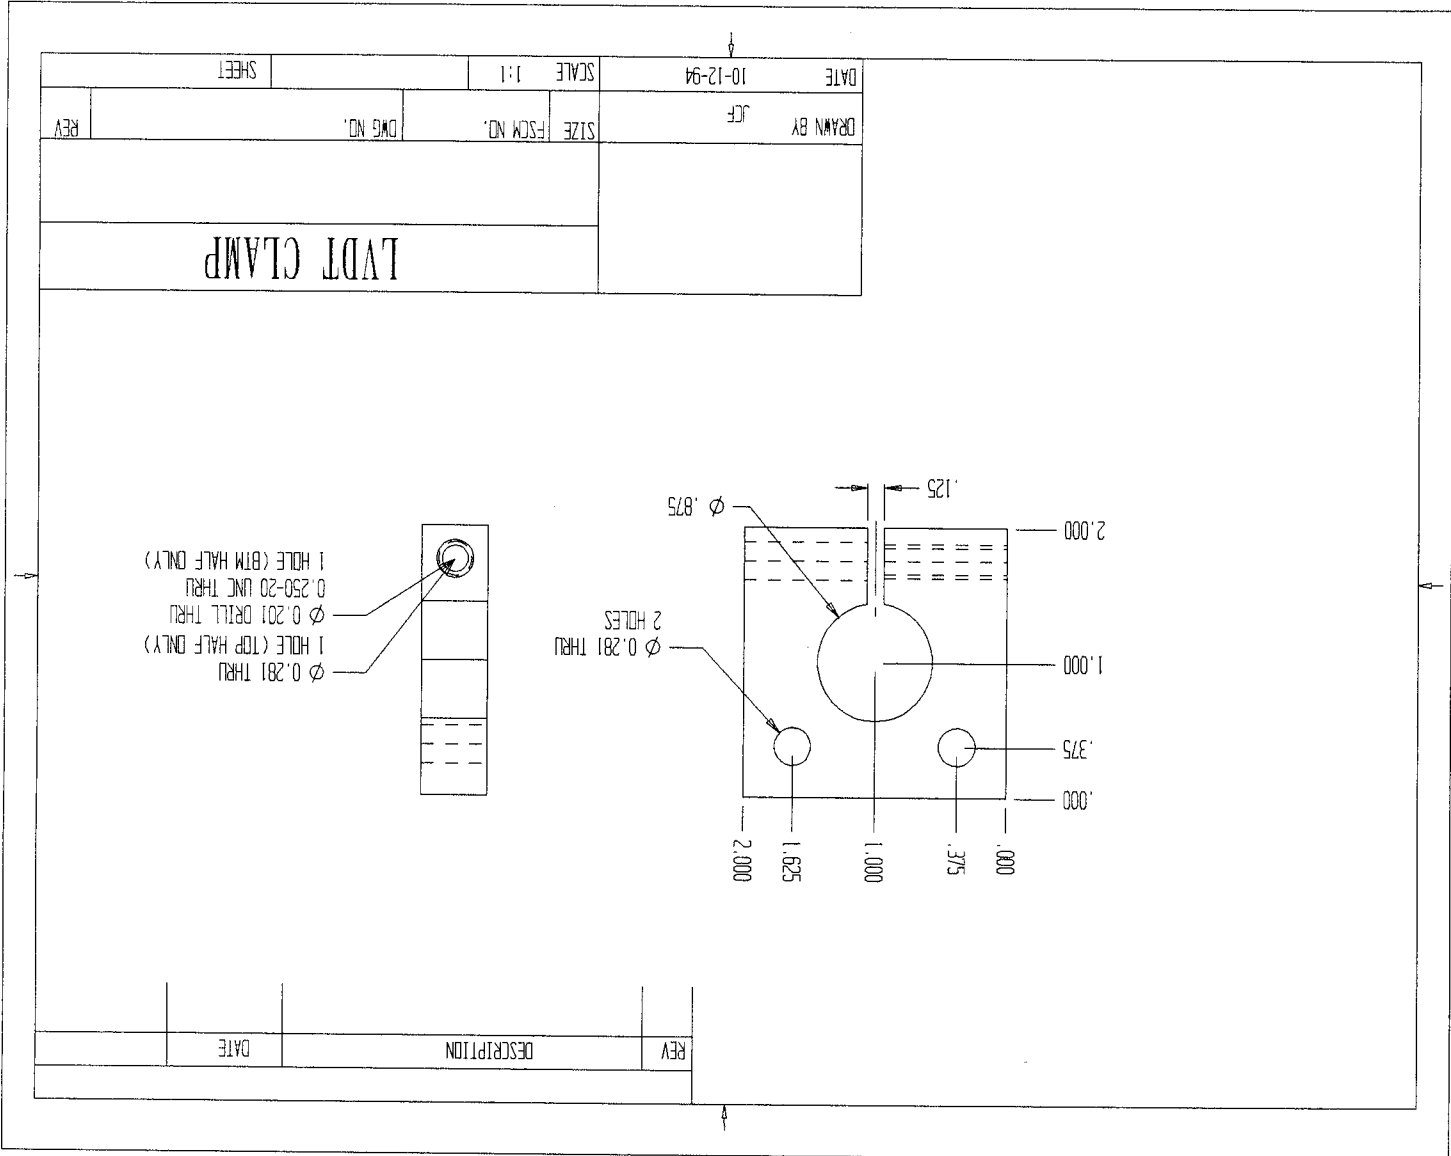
LVDT clamp, Virginia Tech Fixture C.
